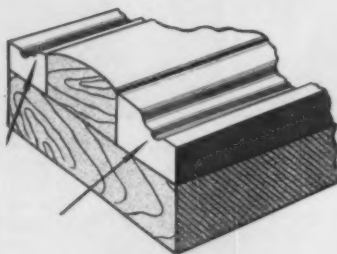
Clay, wood, or plaster run-out (arrows) is then added to the model
